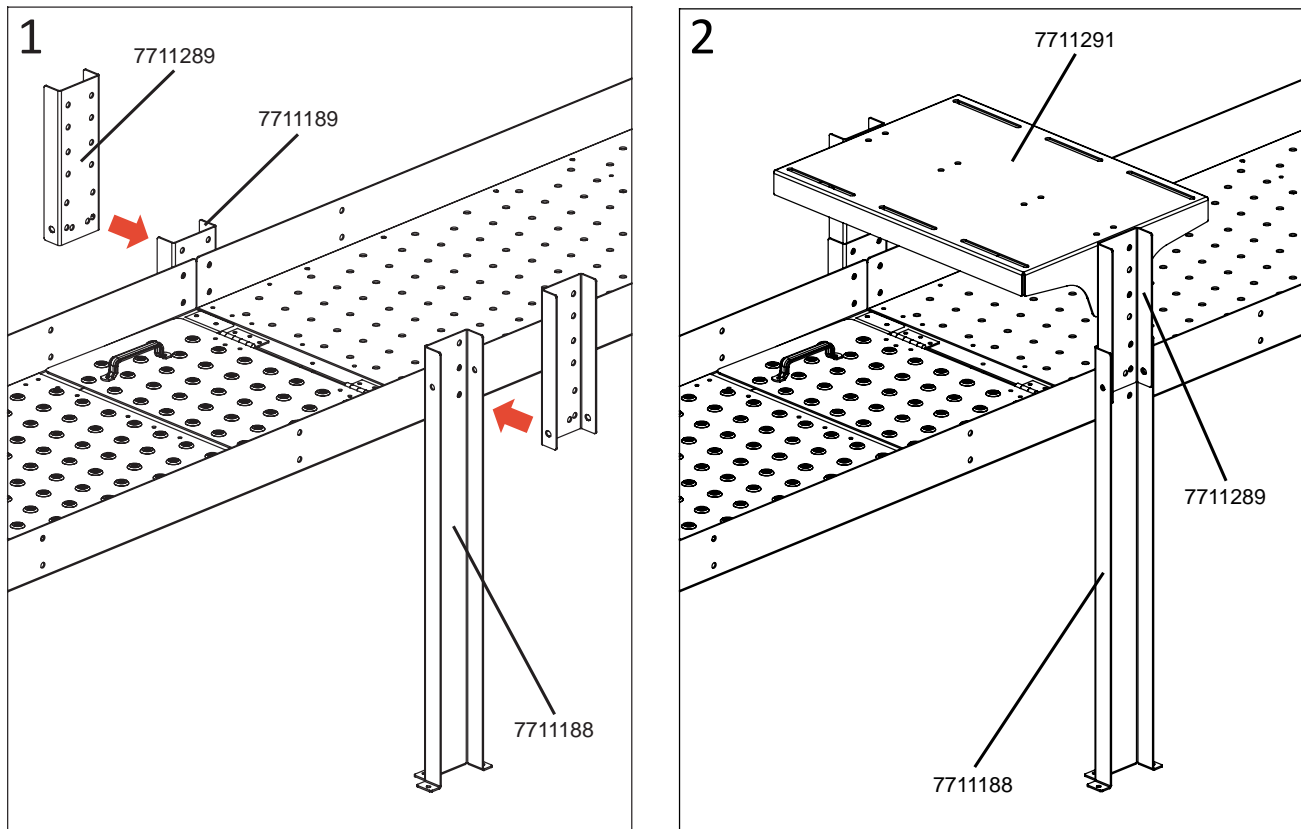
Installing Short Blower Mount Leg Uprights, Close-up Views
